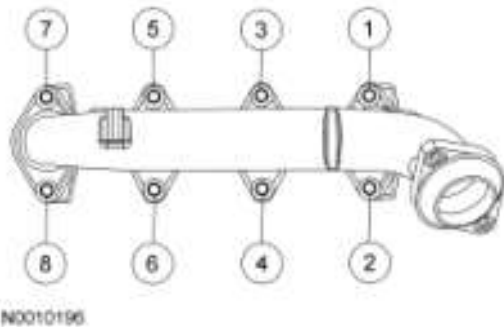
Identifying Tightening Sequence Of LH Exhaust Manifold Nuts
